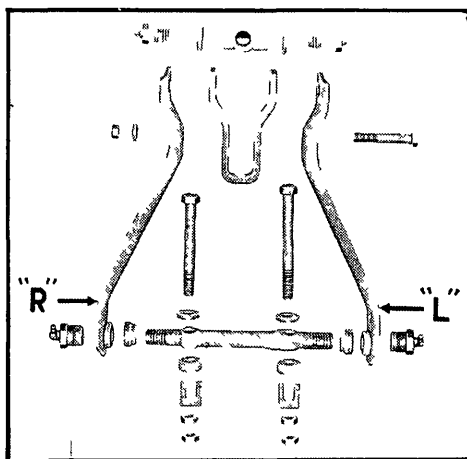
Layout of lower control arm parts. 1950-51 Rambler and All 1952
